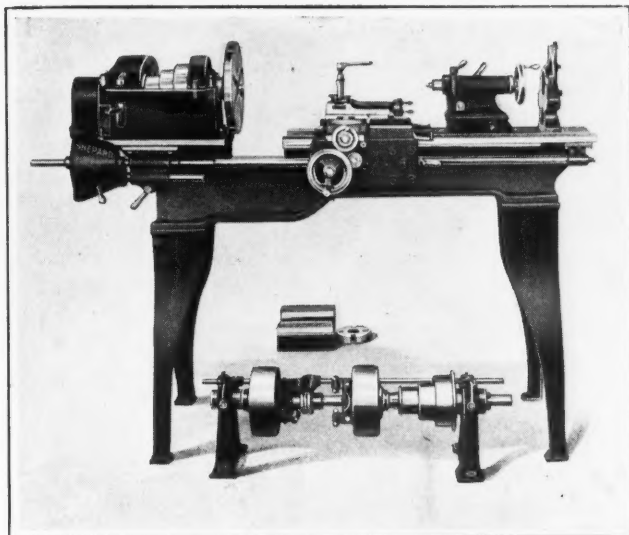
Twelve-inch "New Shepard" Lathe now built in a Gap-bed Design
